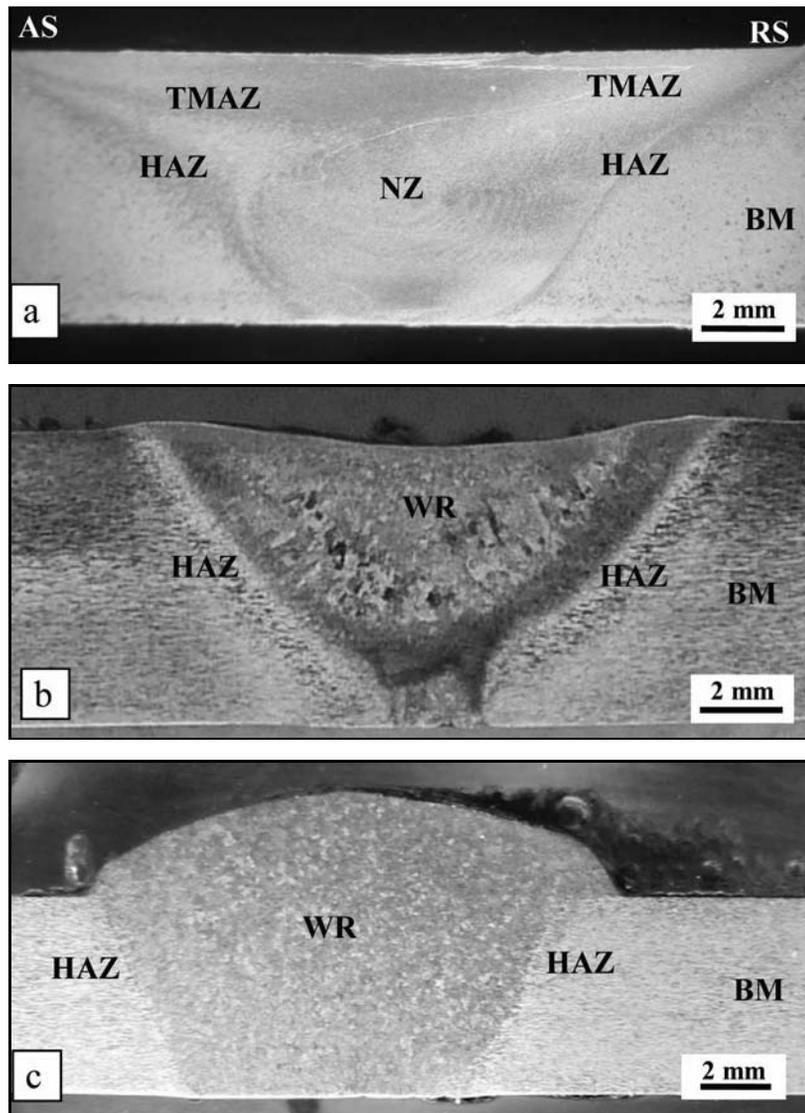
Cross section of joints depicting the various zones formed as a result of (a) FSW, (b) TIG welding, (c) MIG welding.
